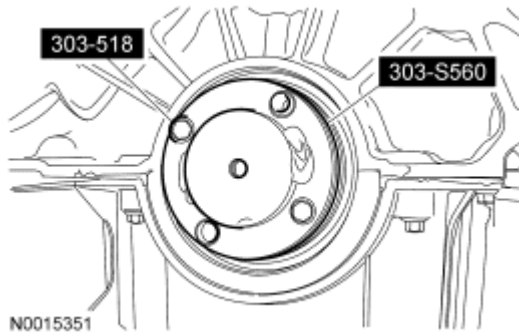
Installing Special Tools On Rear Of Crankshaft
